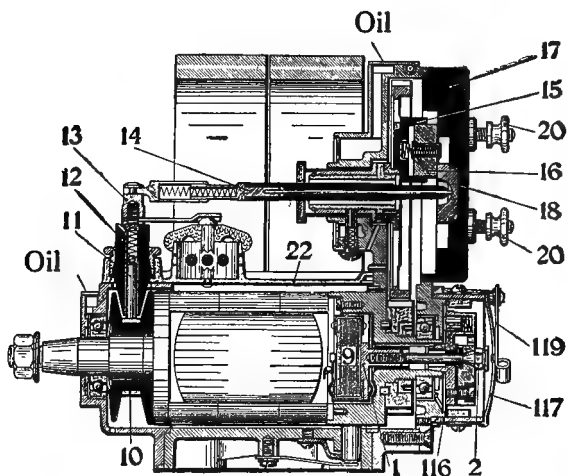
Longitudinal Sectional View of Bosch Magneto.
